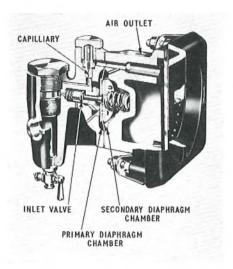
SECTIONAL VIEW OF PRESSURE PNEUMERSTAT
